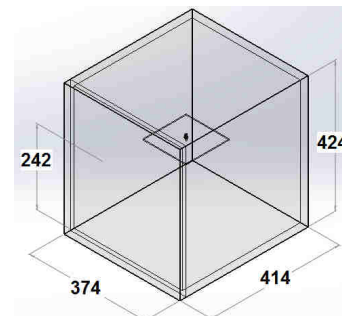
The vacuum chamber with nozzle and heated bed (mm)
